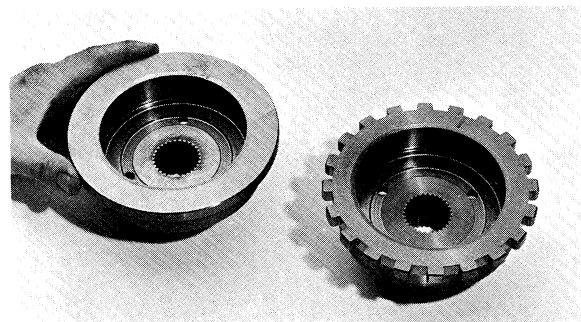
A malleable iron output ring gear whose special-formed 3.666-pitch brake pawl teeth are formed in a 0.40-in. section on a Model VBB at 240 pieces per hour.
